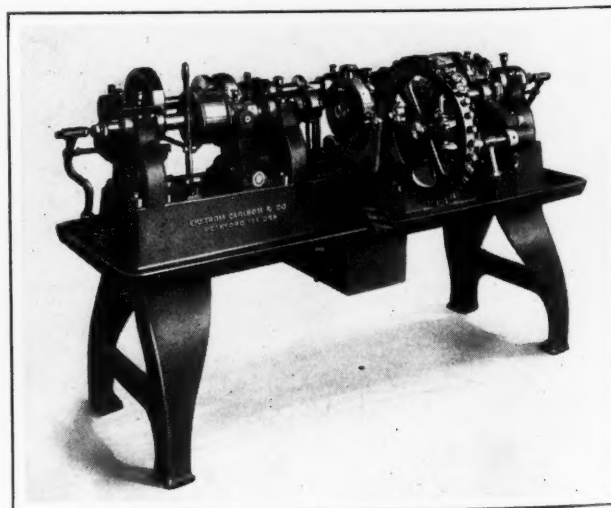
Machine for Automatically Hollow-milling Universal-joint Trunnions
